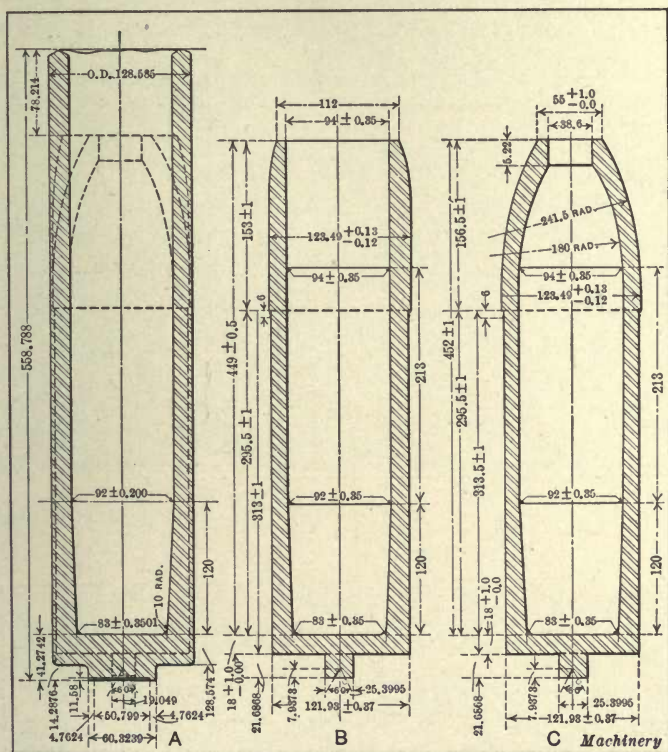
Principal Dimensions of Forging and Condition of French 120-millimeter High-explosive Shell after First Series of Machining Operations
